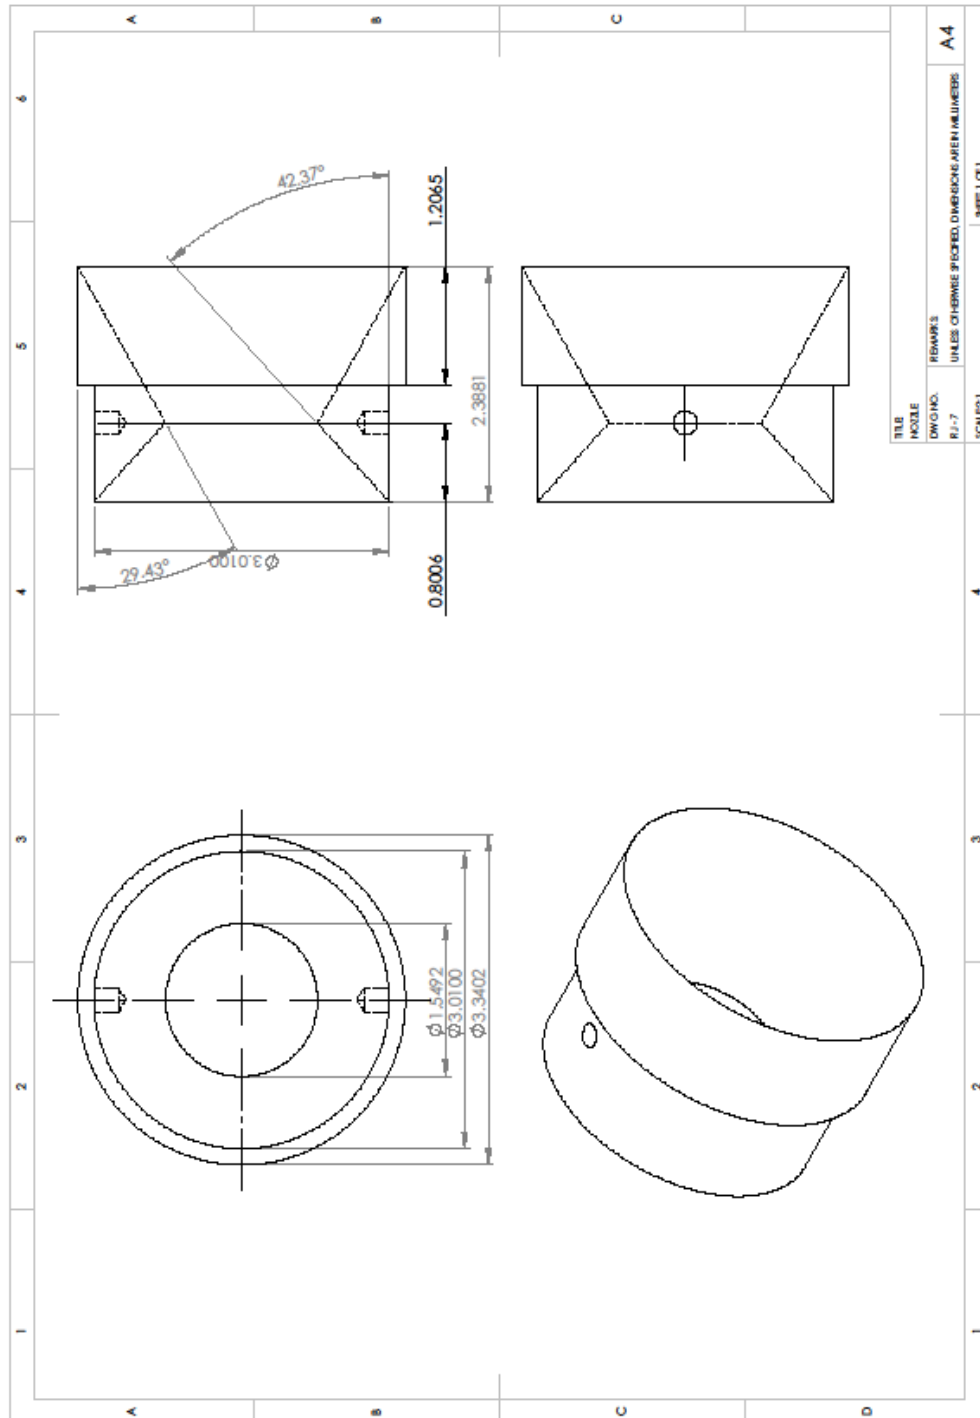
Part drawing: ramjet nozzle with 40% reduced throat area (RJ – 7c).
